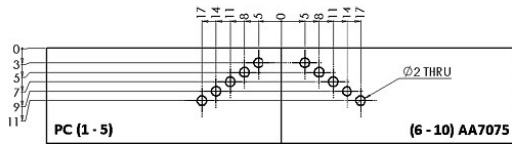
Schematic diagram of ten holes for thermocouple attachment (in mm).
